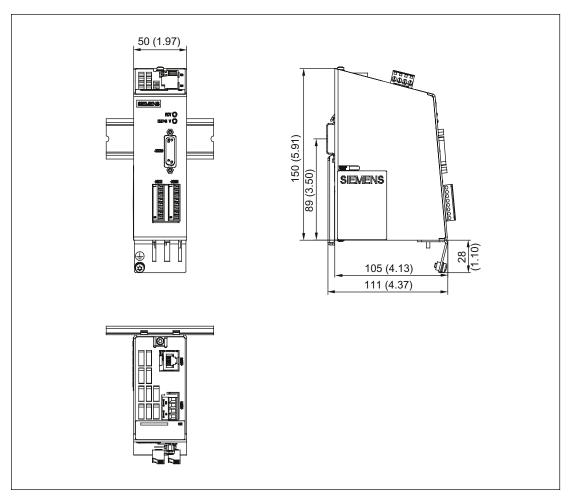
Dimension drawing SMC30: 50 mm wide
